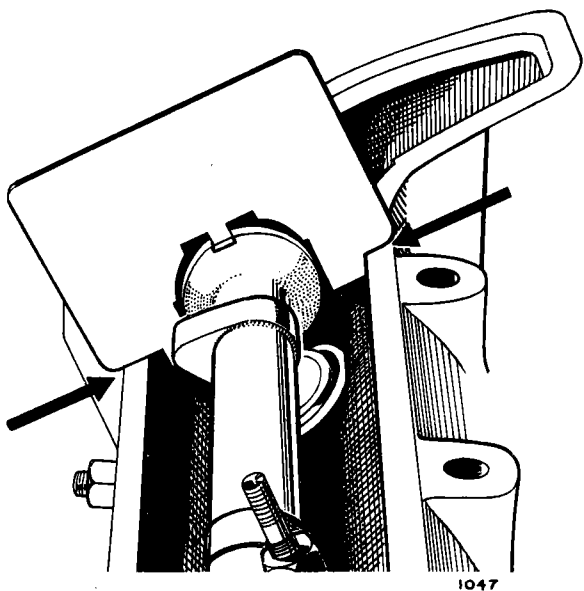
The valve timing gauge in position. Ensure that the gauge is seated at the points indicated by arrows
